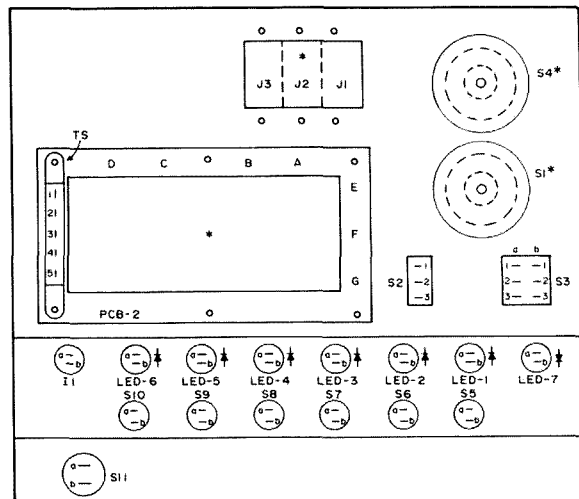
Front panel interior parts placement. *See Fig. 10.
